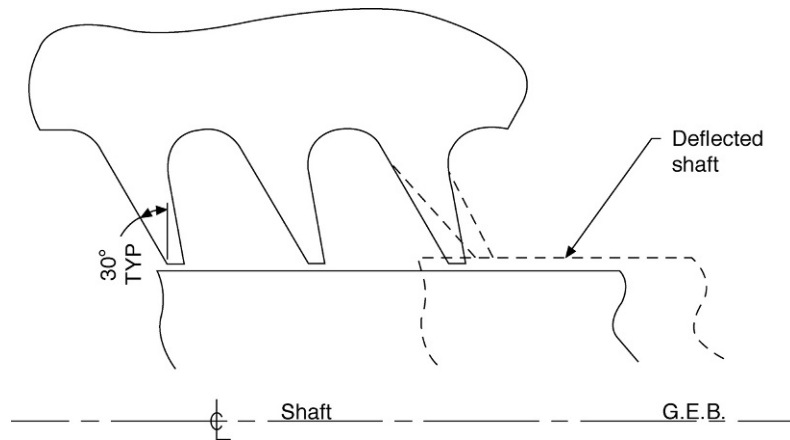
Rub-tolerant polymer labyrinth seal. This type of seal made from Arlon, Torlon, or other thermoplastics is a realistic alternative to abradable seals. The rub-tolerant seal can be designed with abradable seal clearances and a flexible tooth design. This feature accommodates vibration excursions with negligible tooth wear. An additional benefit is the ability of the polymer material to withstand very corrosive environments.
